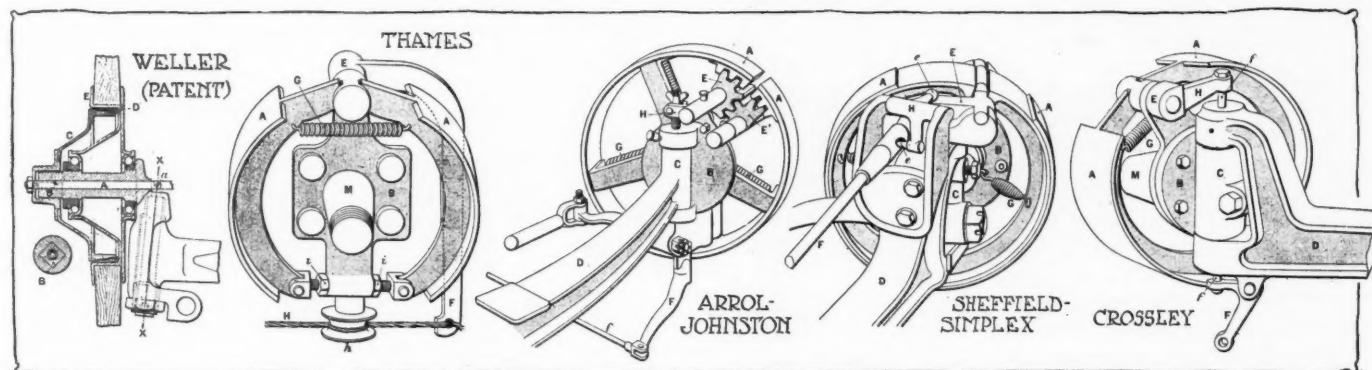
Weller design (American patent, so far as known not in actual use): A brake shaft through wheel spindle, a cable attachment, B square key on end of A for actuating male cone C, D female cone. Fig. 5—The Thames brake; same reference letters as Figs. 2 and 3, M wheel spindle, H adjustment screws for each brake shoe individually, E cam, Hh cable and pulley. Fig. 6—Arrol-Johnston brake; main reference letters denote same as before; EE' toothed sectors controlling brake shoes. Fig. 7—Sheffield-Simplex brake; reference letters as before; cc flexibly connected levers for operating cams. Fig. 8—Crossley brake; reference letters same as before; cam operated from shaft passed through center of steering knuckle and pivot pin
